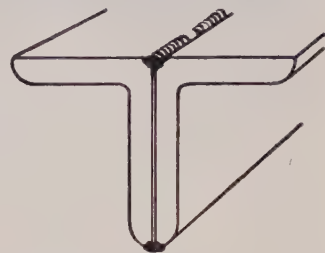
Tee section fabricated in small lots by welding standard angles back to back. Requires only hack saw and welder.
